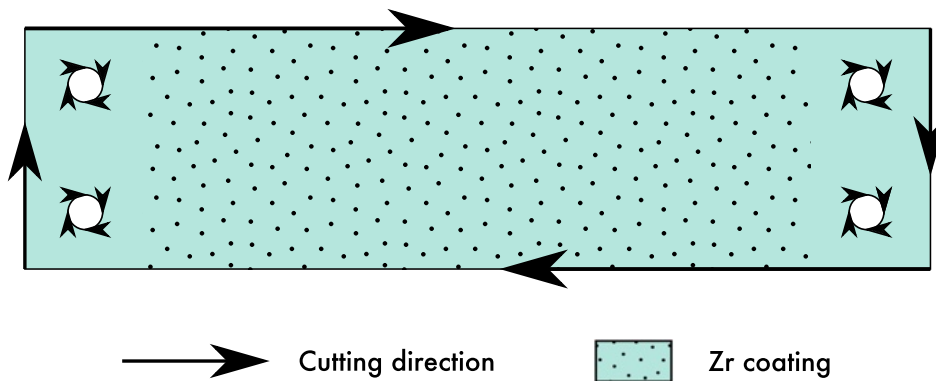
U-10Mo assembly removed from the metallic canister in laser cutting machine
